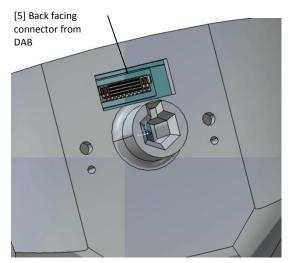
System-concept 21, Backside of the steering wheel with back facing connector from DAB.
